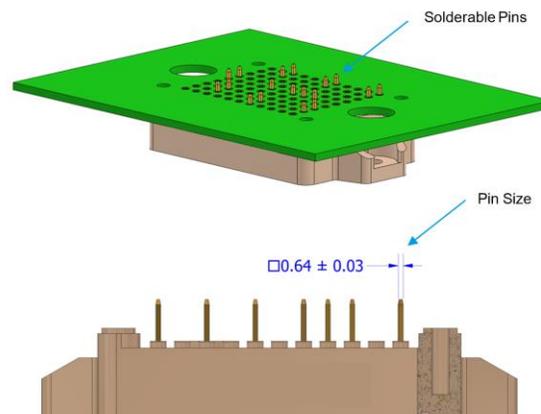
Module mounting to PCB prior mounting to a heat sink.
